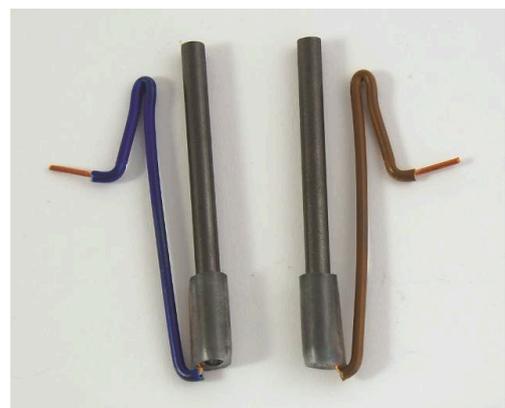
The ends of the copper cables are inserted between the tube and the electrode
